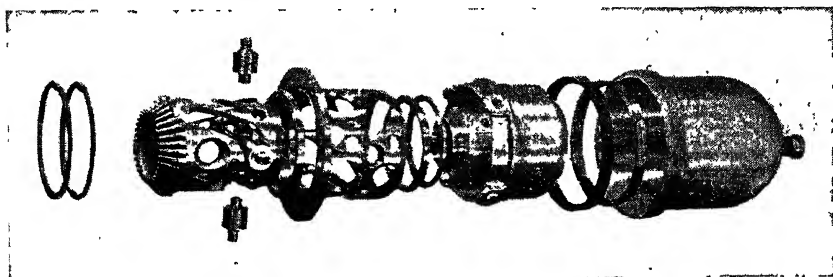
Exploded view of the dome assembly from a hydromatic propeller.
